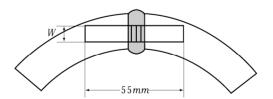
The position of selection for impact test specimen taken from the weld zone of electricresistance welded steel pipes
